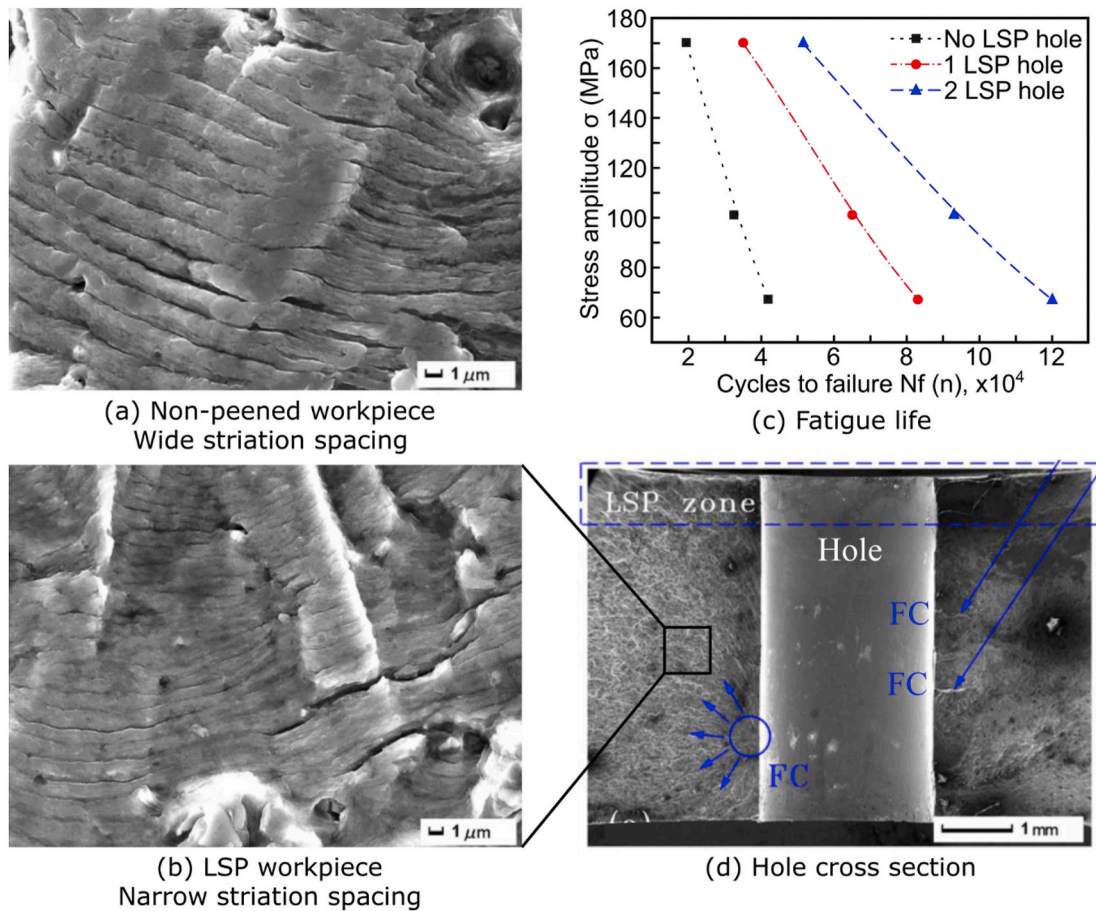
Local effect of laser shock peening (LSP) on hole fatigue behaviour in AL 7075-T7451 in the vicinity of a 3 mm machined hole. (a) A non-peened sample exhibits wide fatigue striation spacing after a fatigue crack (FC) is created on the hole surface. (b) LSP creates narrower striation bands due to the induction of compressive states. (c) A comparison of fatigue life between these samples, showing that LSP increases fatigue life of the hole significantly under both low and high values of stress. (d) Example of where the striation fatigue bands could be observed in the LSP-worked sample. From Ren et al. [198].
